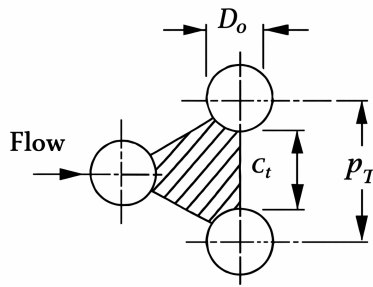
Triangular 30° staggered tube layout illustrating the tube pitch P_t and the tube external diameter D_o .
